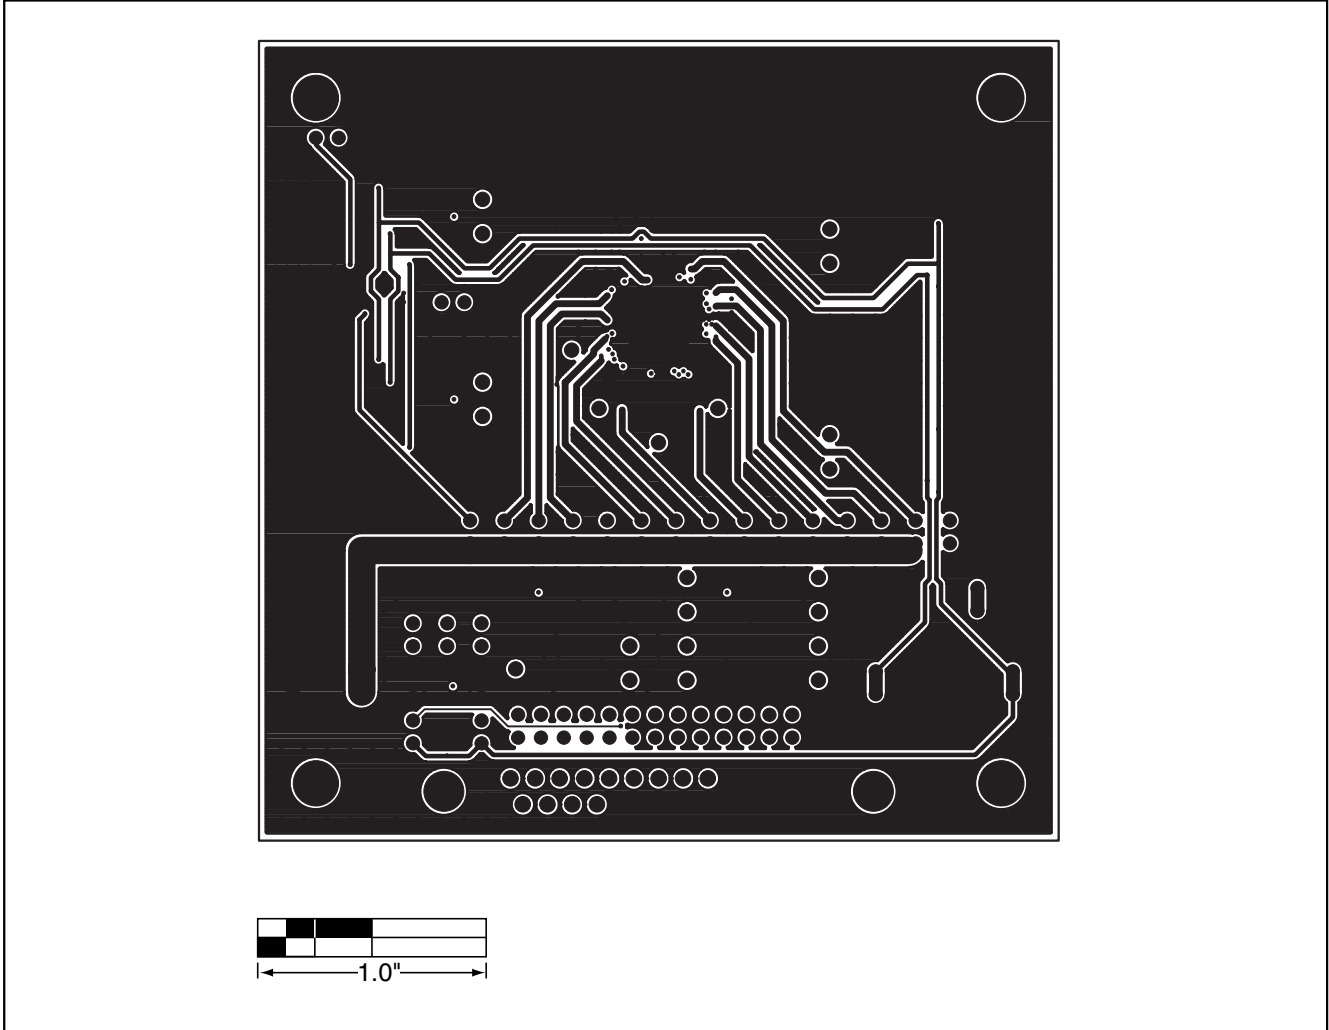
MAX2825/MAX2826/MAX2827 EV Kit PC Board Layout—Inner Layer 3, Routes
